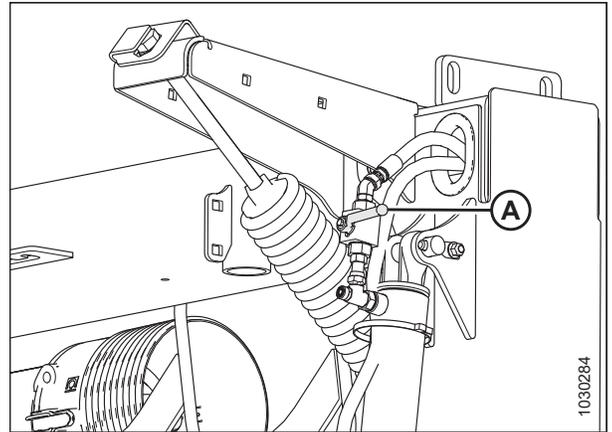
Cylinder Lock-Out Valve – Closed Position
